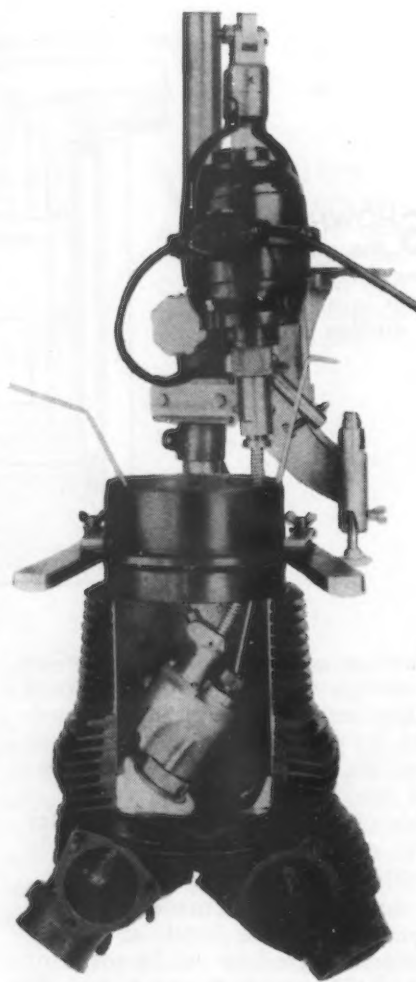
This compact little high speed power tool finishes aircraft engine valve seats to a ten thousandth in 4 to 5 min. Because of its compactness and high speed (10,000 and 15,000 r.p.m. motor speed), the problem of lubrication is a difficult one. Use of a special grease containing Oildag colloidal graphite has reduced the operating temperature and lengthened the life of the tool on production work.
